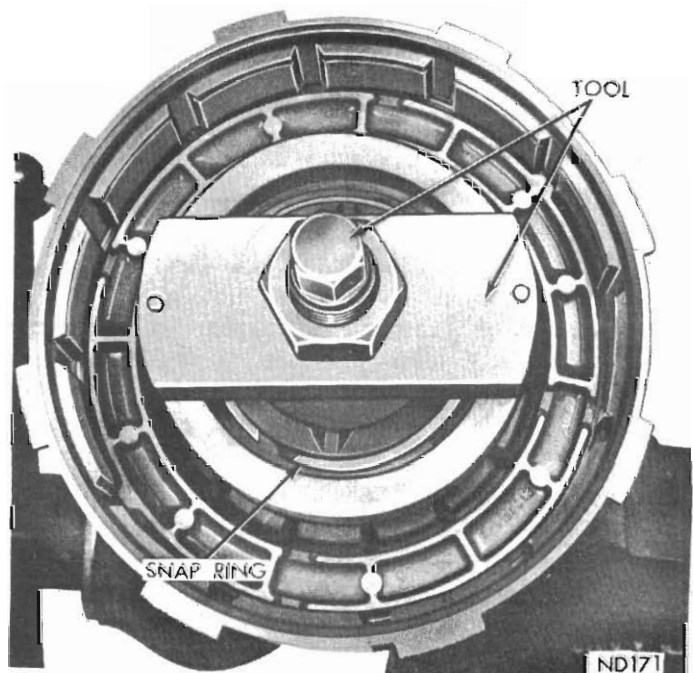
Removing or installing front clutch spring retainer snap ring (A-727)
